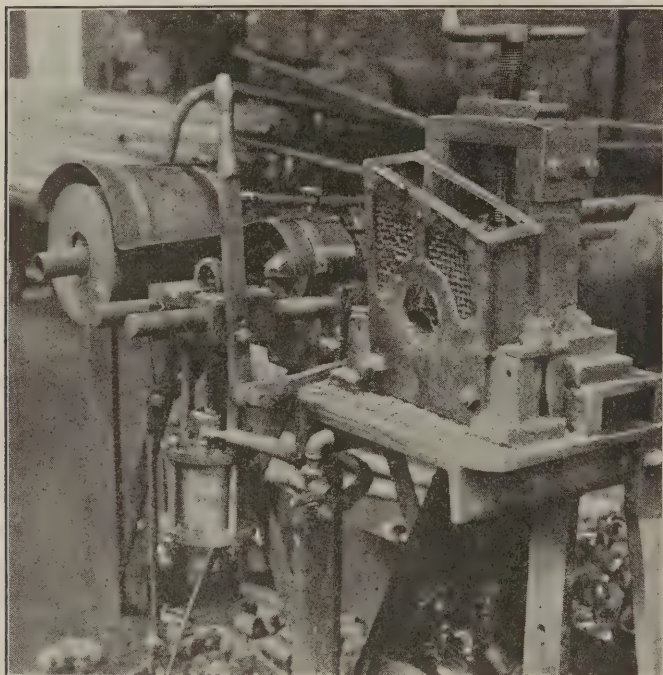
Pipe Cutter, Reamer and Grinder Used to Prepare Boiler Tubes for Welding On Safe-Ends
